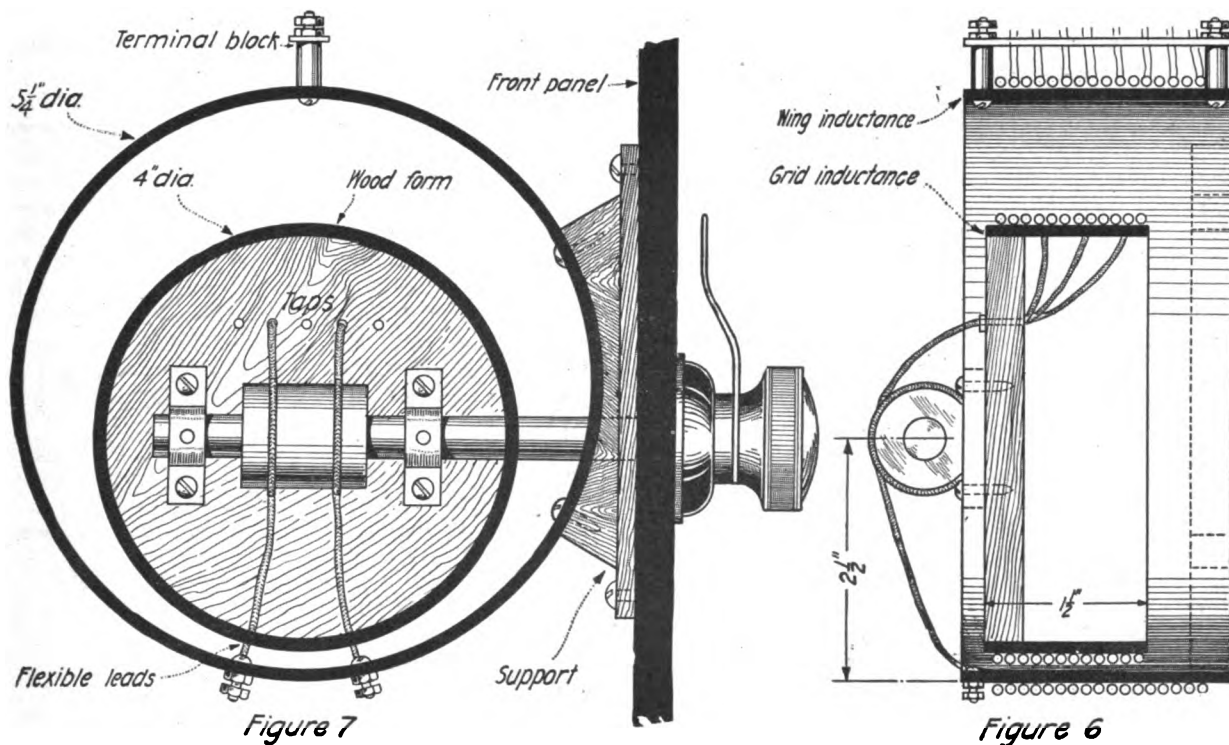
Front sectional view and Figure 7, side view of the construction of the coupling device
